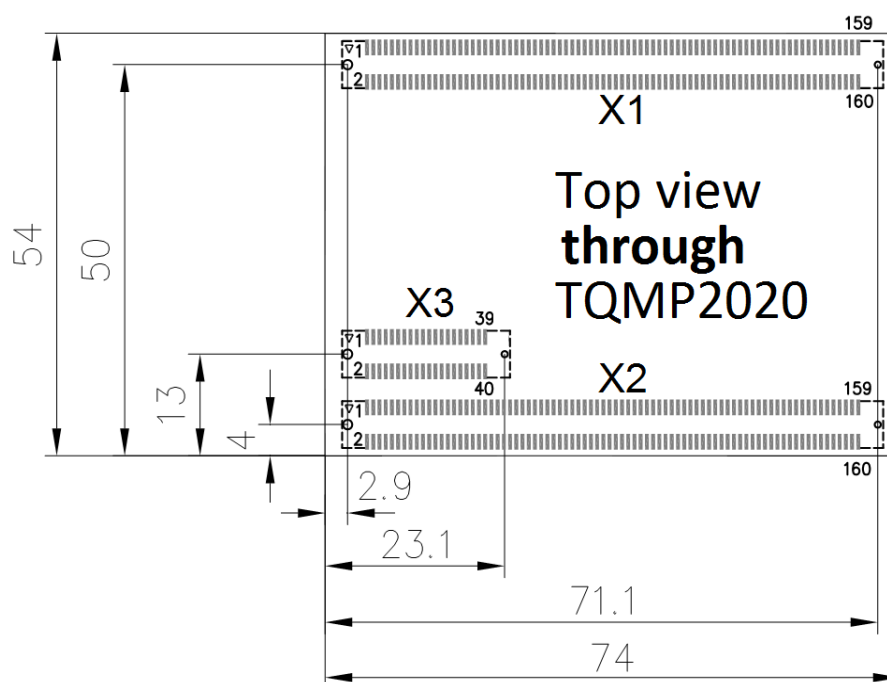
TQMP2020 dimensions, top view through TQMP2020
